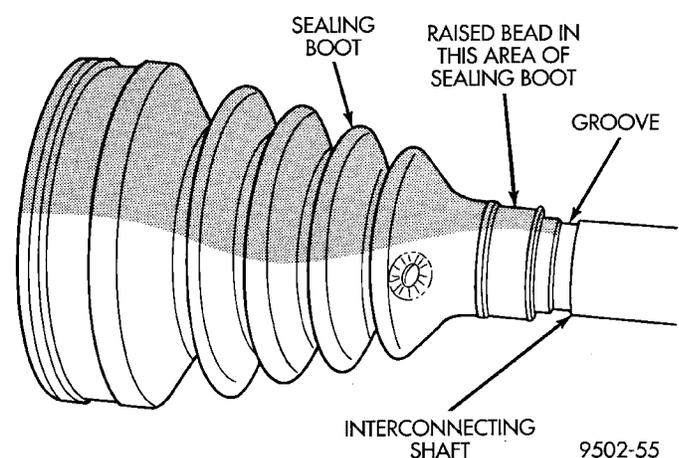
Sealing Boot Installation on Interconnecting Shaft
